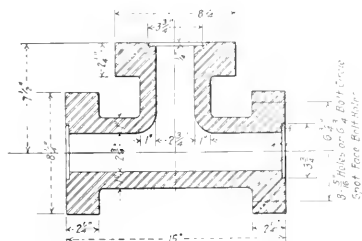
TYPICAL FLANGED FITTING FOR 7500 LB. PER SQ. IN.
